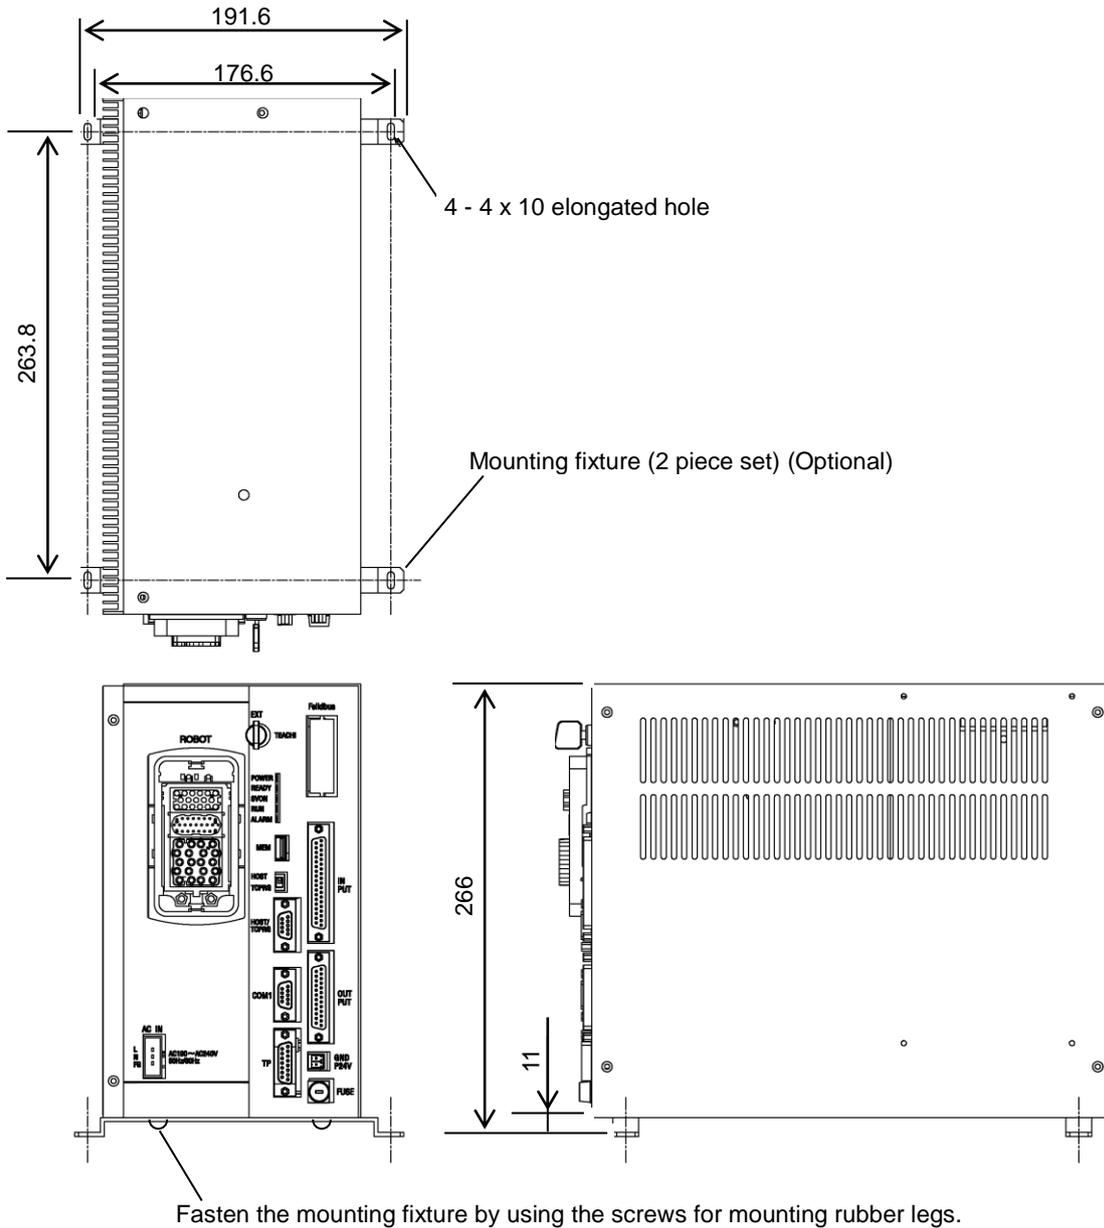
Screw hole dimensions for securing controller (KSL3000)
